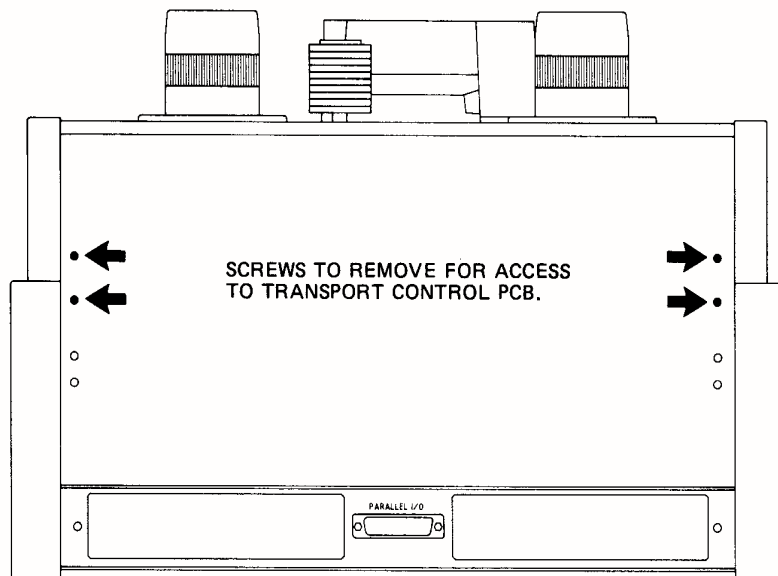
Screws to Remove for Access to Transport Control PCB
